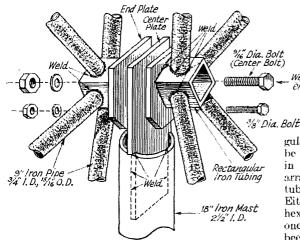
Sketch showing the heart of the Spider Quad. Once the various pipes, plates and tubes have been welded, they are cleaned and hot-dipped galvanized.
